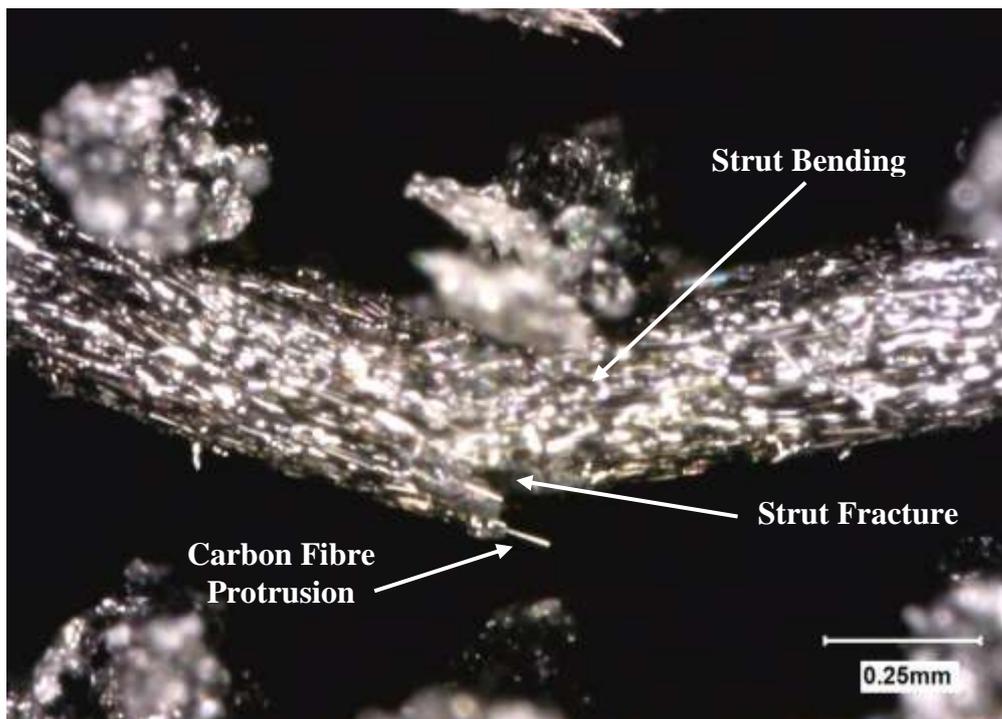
Bending and fracture of the 3D printed carbon/PETG strut.
